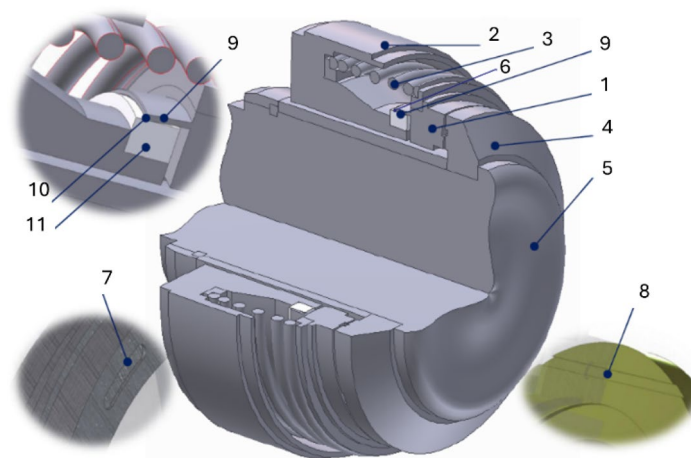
Impulse face seal (IFS) ring of the pump: 1 – axially movable ring; 2 – seal housing; 3 – spring; 4 – supporting metal ring; 5 – rotor shaft; 6 – face surface of ring 1; 7 – chambers; 8 – tangential channels; 9 – secondary seal; 10 – sealed surface of the conical nose; 11 – sealed surface of the sleeve.
